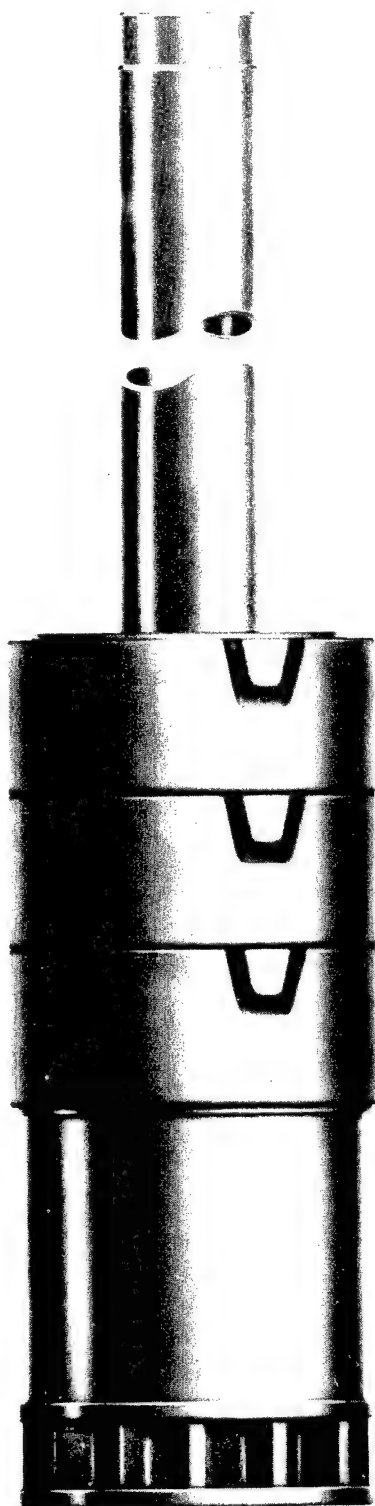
View of a stacked "do-nut" drill collar assembly. Photo-Hughes Tool Co.
